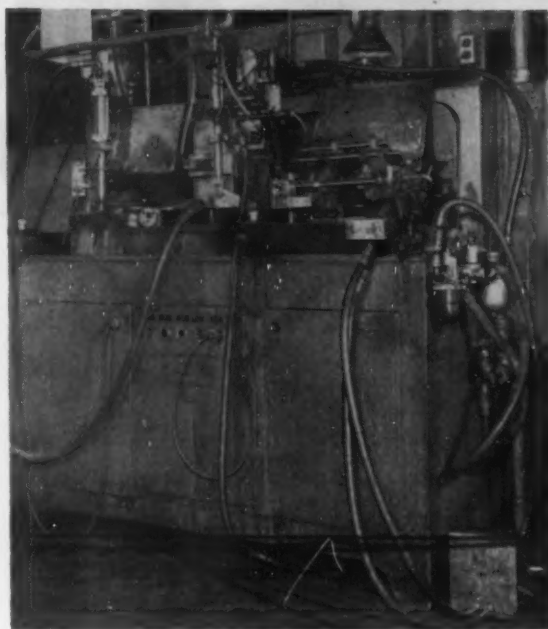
View of Thermonic radio frequency induction heating machine. Operator places part in the fixture at the front, fixture indexes one notch, permitting loading another part. After heating, part indexes for quenching.
